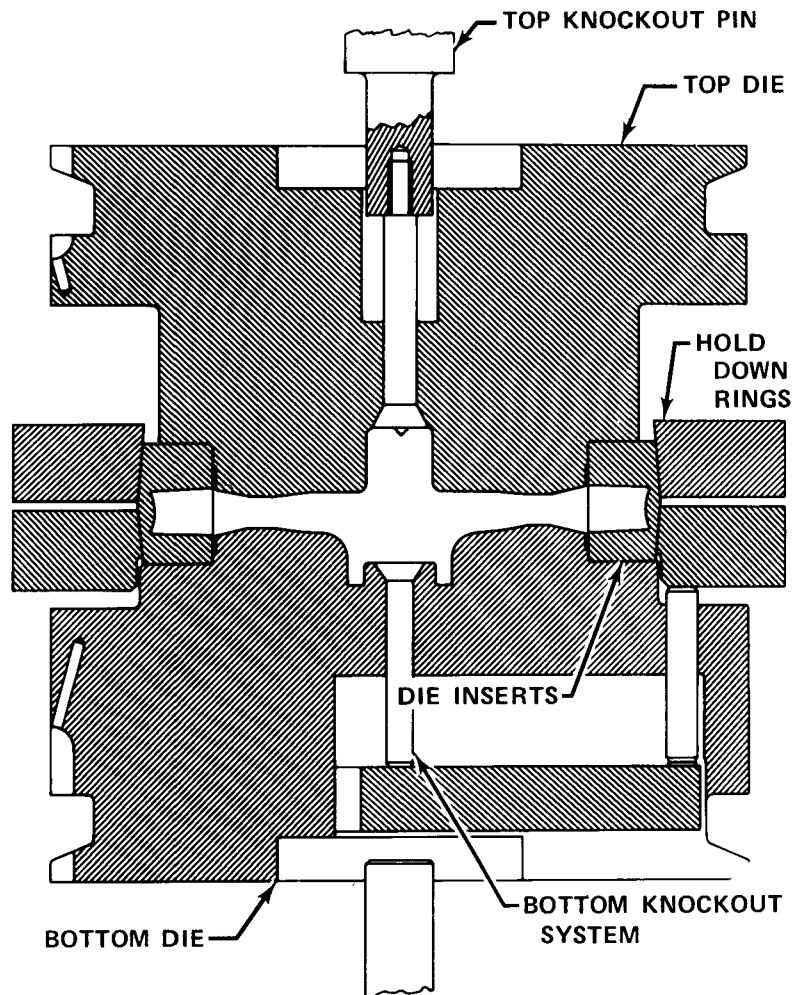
Tooling for Phase I - Task II Bladed Wheel FD 74448B
